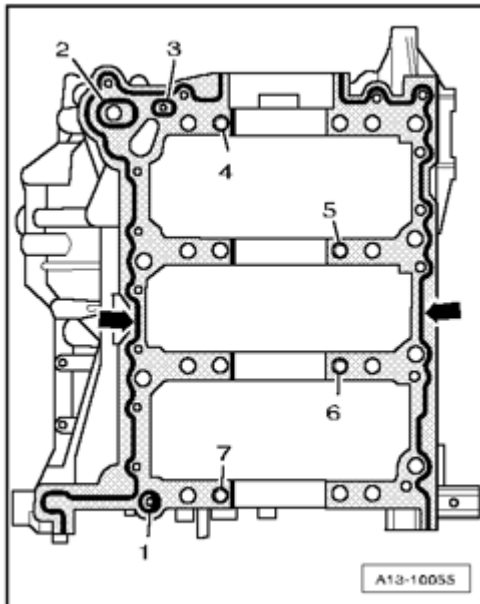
Sealant Application For Guide Frame, Position Of Alignment Bushings
